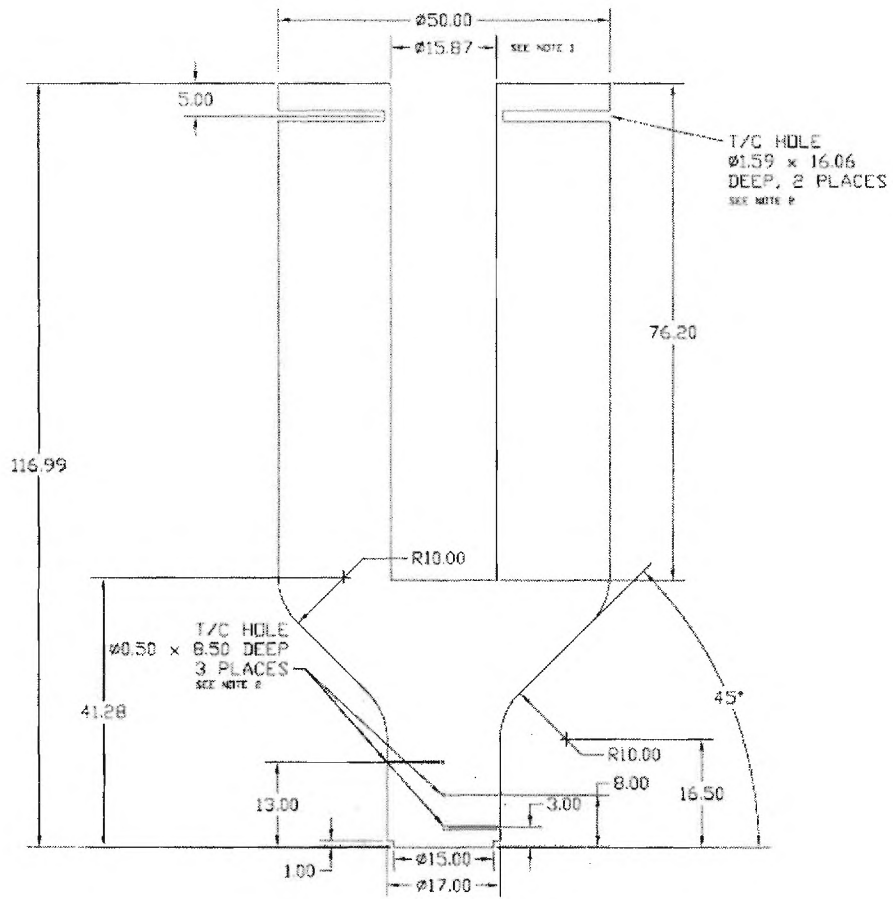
Drawing of the copper heater block from AutoCad 2006.
